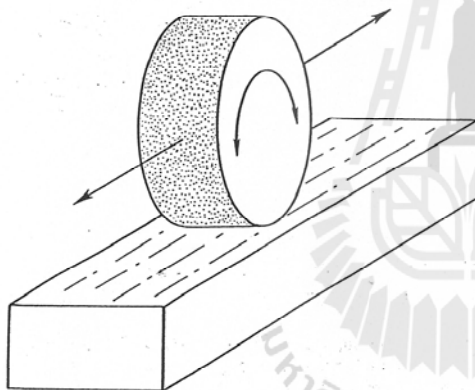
Surface Grinding Parallel to the Specimen Longitudinal Axis
